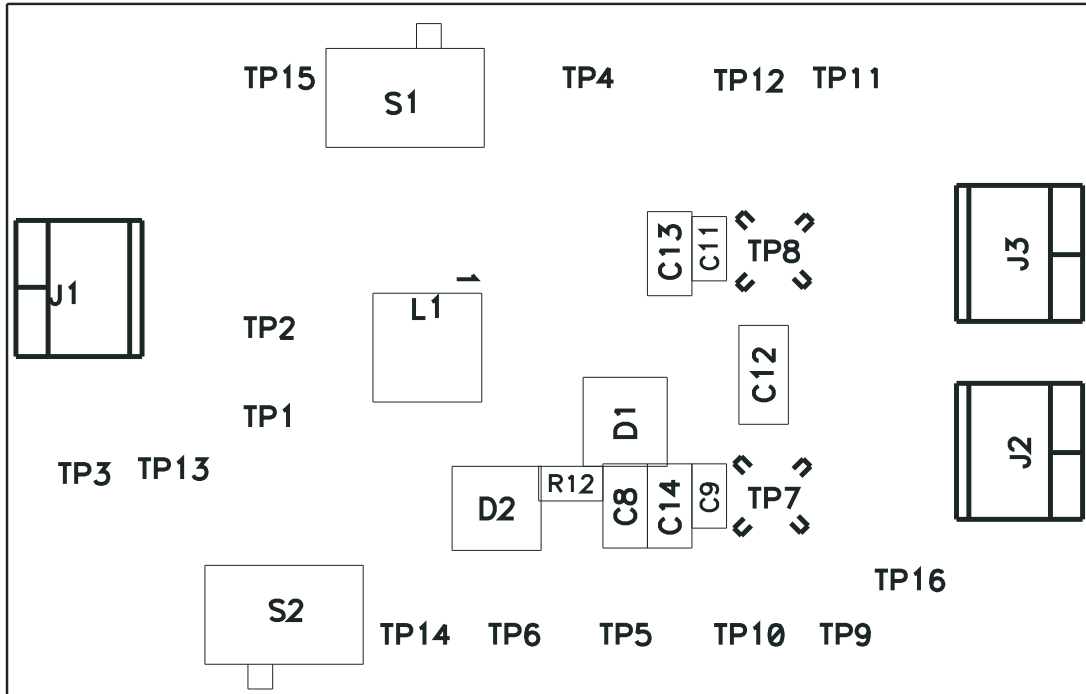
UCC25230EVM-754 Top Layer Assembly Drawing (top view)
